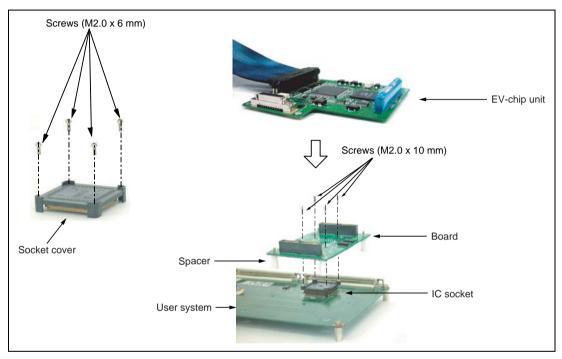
User System Interface Board for the SH7083 PTQP0100KA-A (Former Code: TFP-100BV) Package
